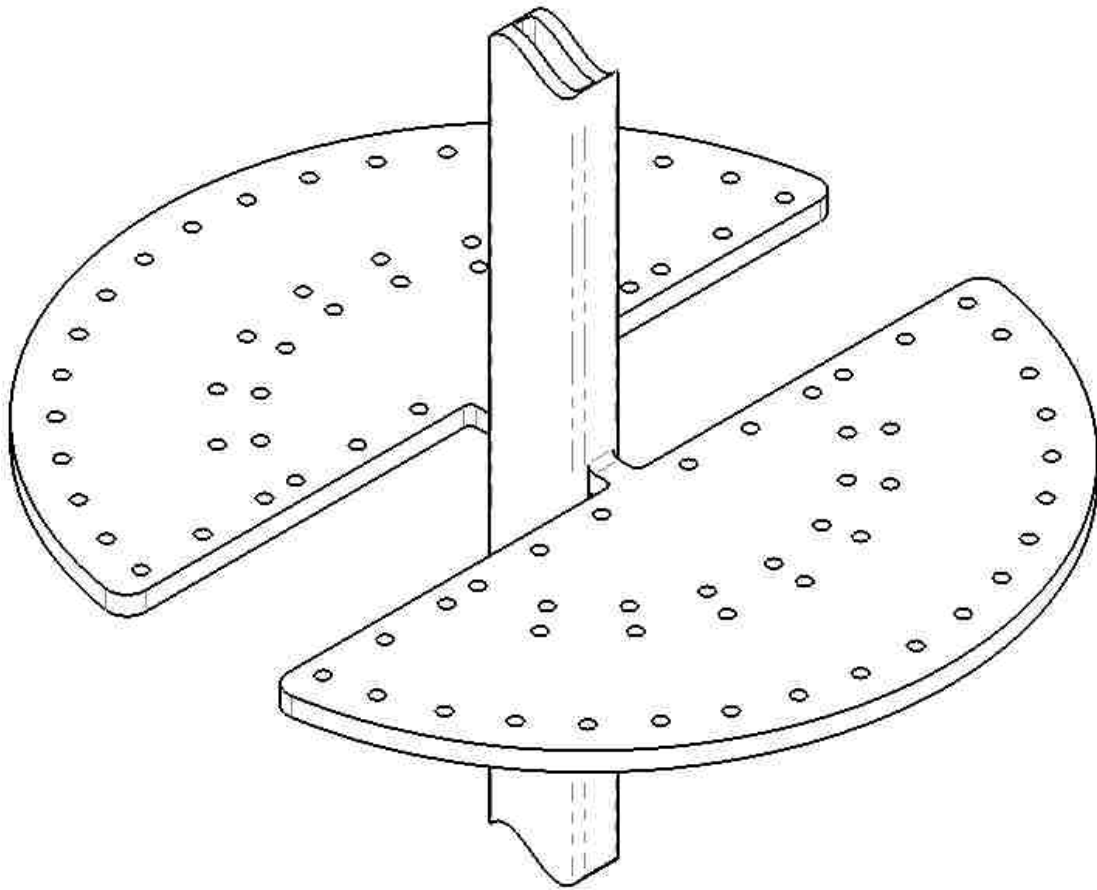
Isometric View. Bi-Cantilevered Drain/Cantilever composed of a Rectangular Drain and two Semicircular-shaped Cantilevers attached to the Width.
